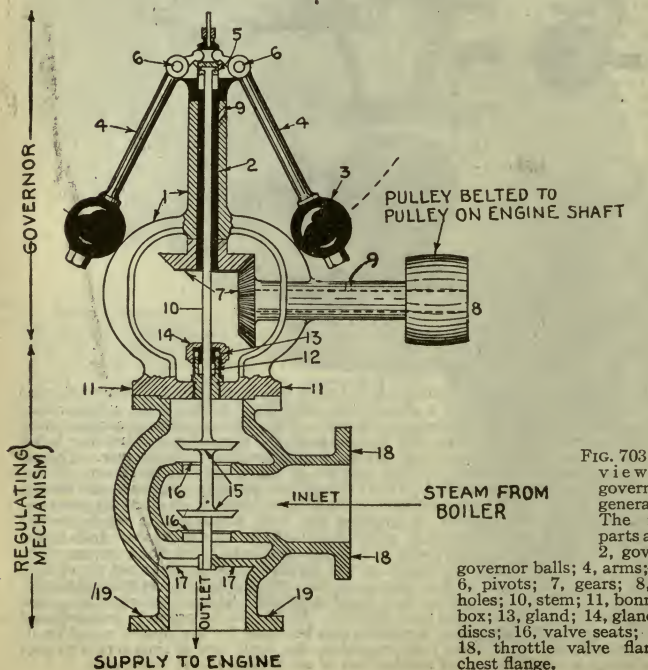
Sectional view of throttling governor showing general construction. The names of the parts are: 1, standard; 2, governor shaft; 3, governor balls; 4, arms; 5, stem swivel; 6, pivots; 7, gears; 8, pulley; 9, oil holes; 10, stem; 11, bonnet; 12, stuffing box; 13, gland; 14, gland box; 15, valve discs; 16, valve seats; 17, stem guard; 18, throttle valve flange; 19, valve chest flange.
